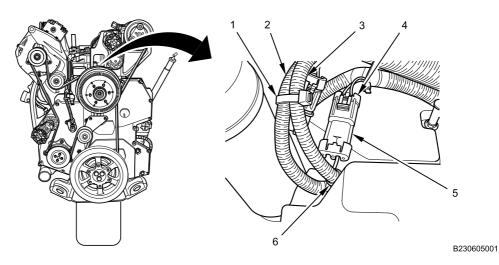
Engine Wiring Harness-to-Engine Sensor Harness Connection.
